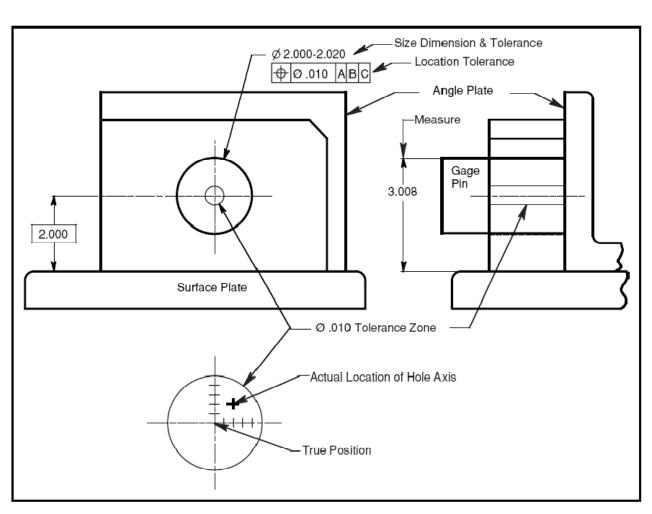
Inspecting the hole location by using the theoretical tolerance zone.
